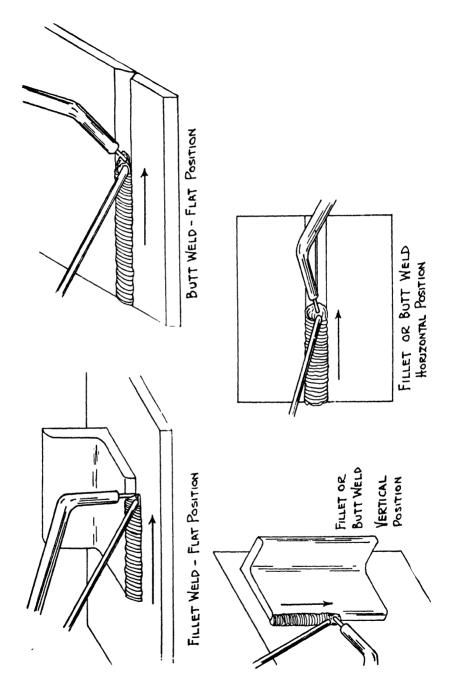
The positions of the rod and flame in backhand technique. The arrow indicates the direction of welding
